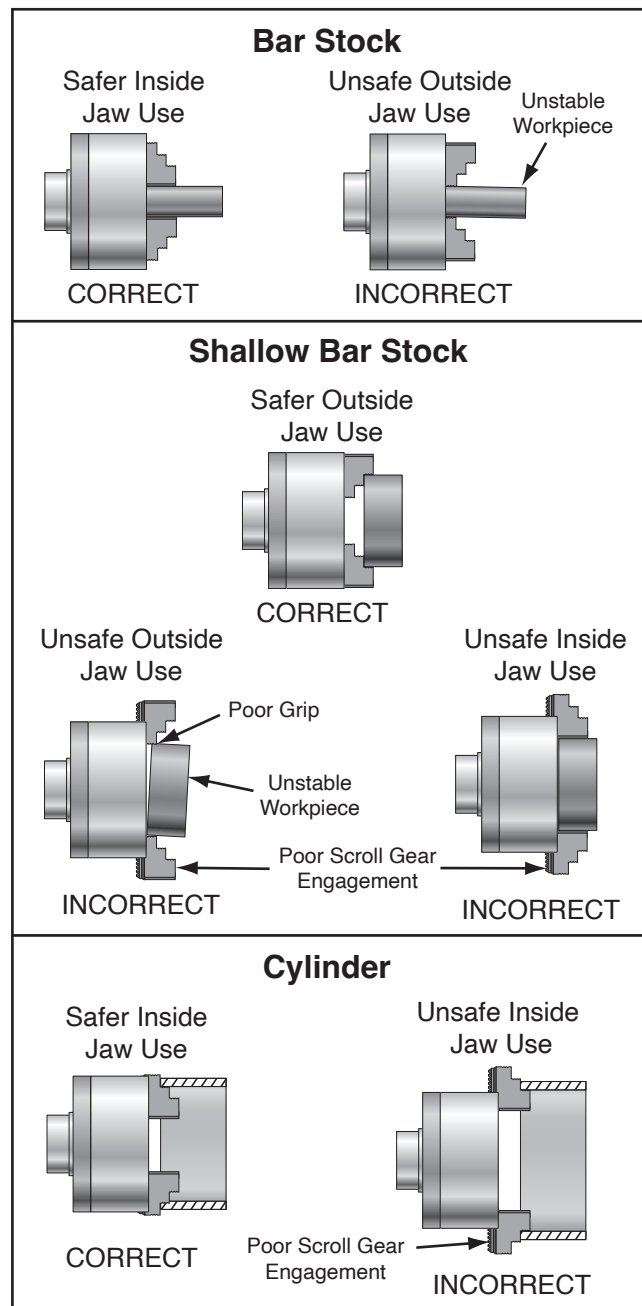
Safe and insufficient jaw selection and workpiece holding.
